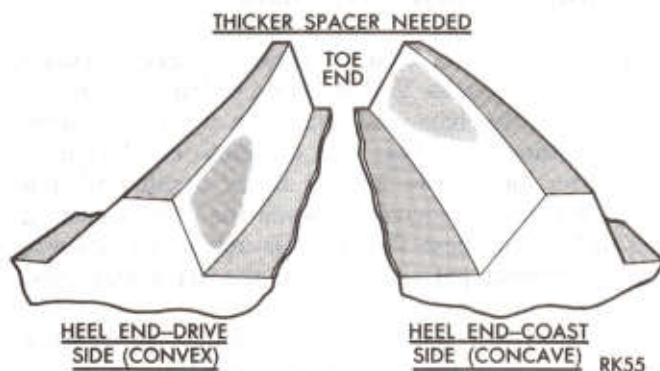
Incorrect Tooth Contact Pattern (Increase Spacer Thickness)
